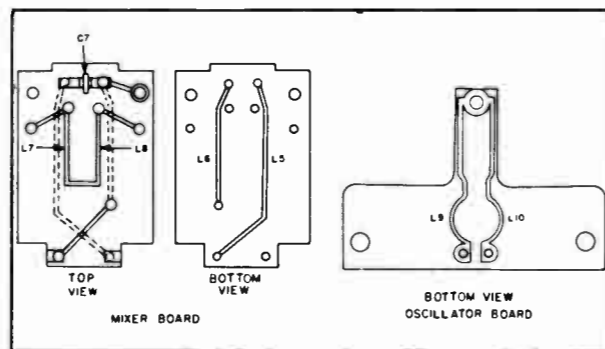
Oscillator and Mixer Board Layouts, UHF Tuner
